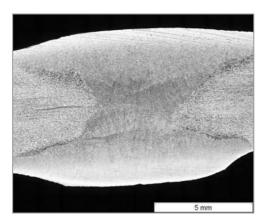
Double-sided headwave weld of duplex steel made by welding with coated electrode Avesta 2205 AC/DC (magnification 1:1)
